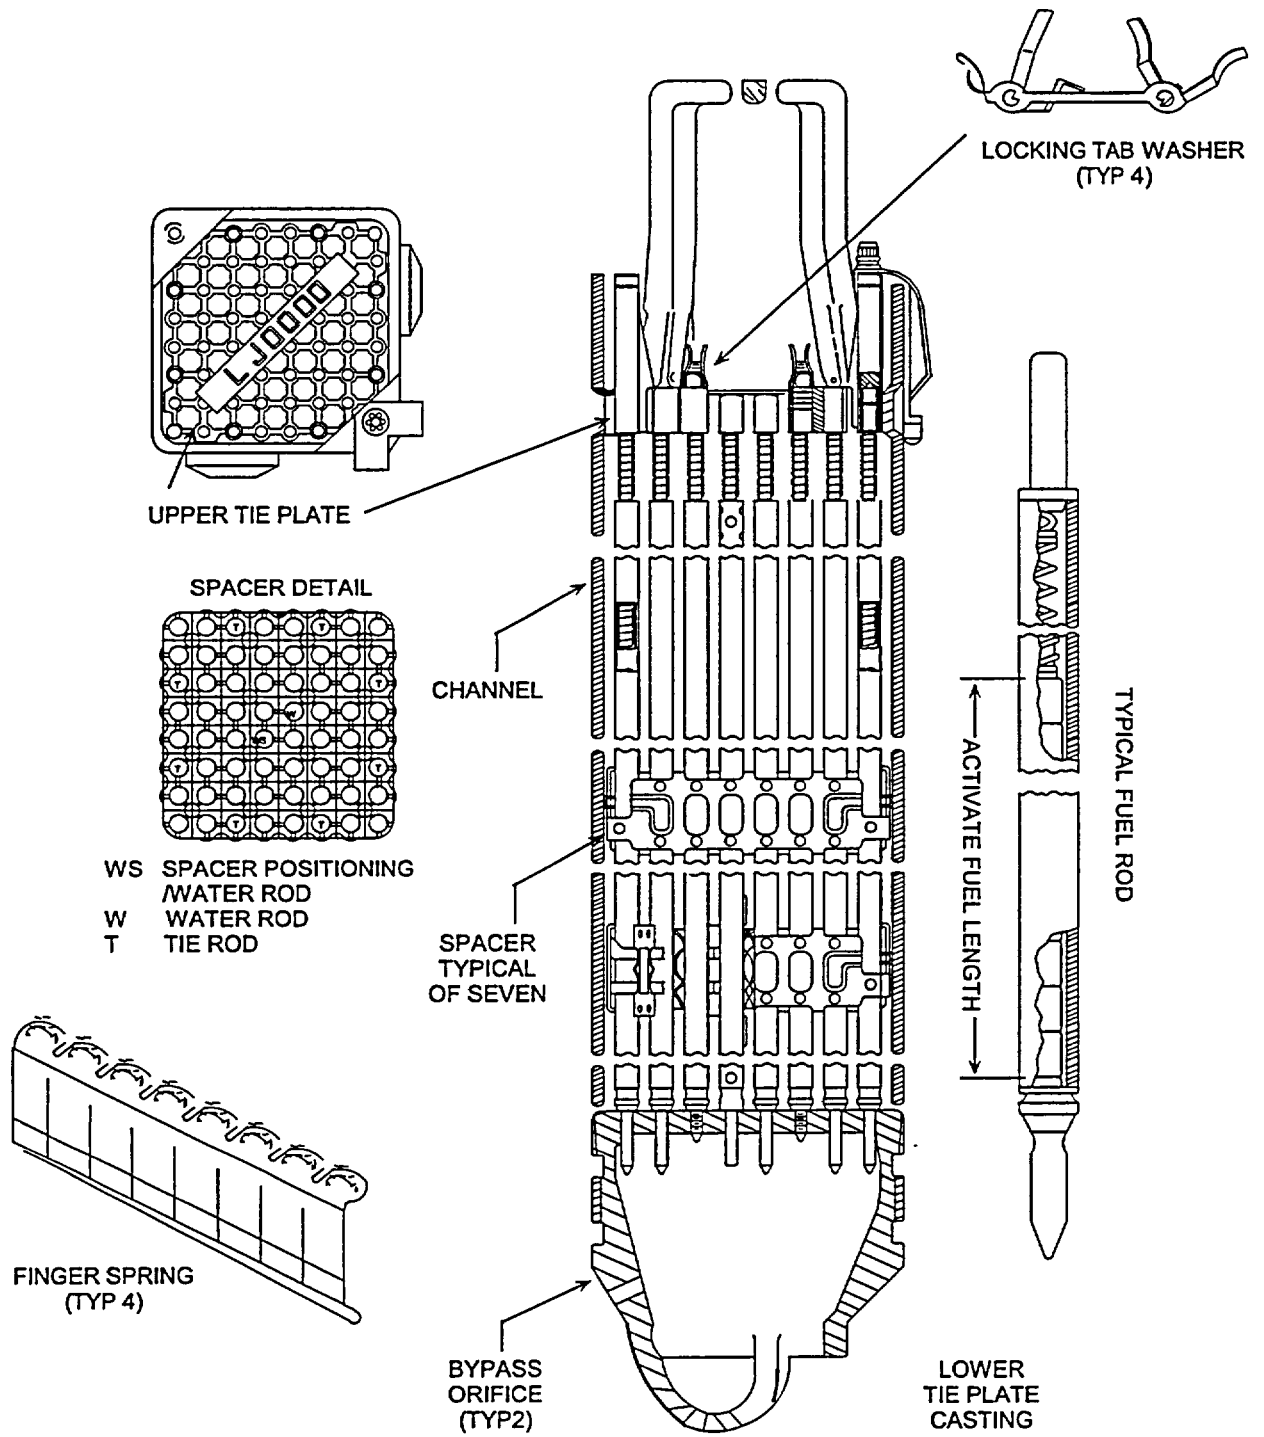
FUEL ASSEMBLY DETAILS
